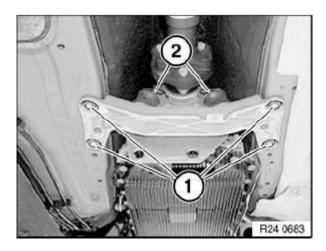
Identifying Transmission Cross-Member Screw And Nut Courtesy of BMW OF NORTH AMERICA, INC.
